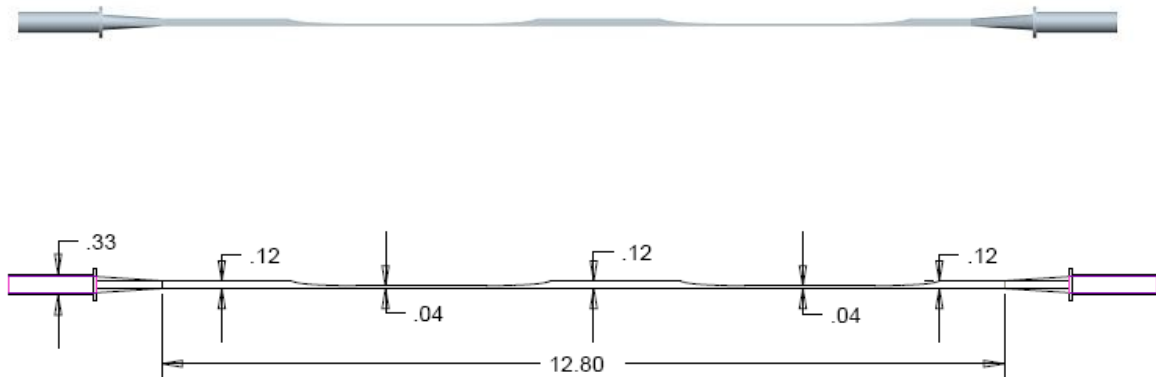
Front view of chamber, which was designed using Pro Engineer. Dimensions are expressed in inches.
